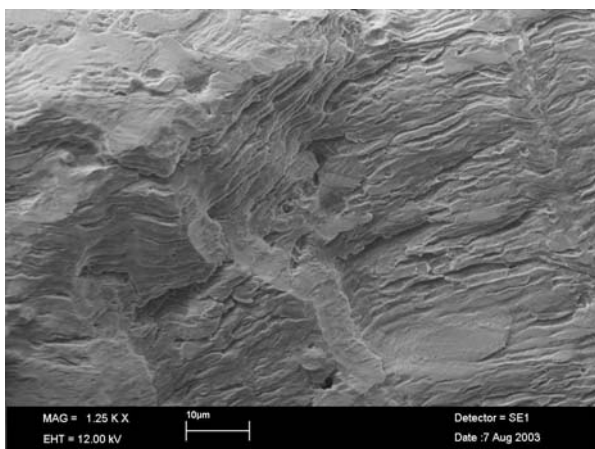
SEM fractograph showing fatigue striations of the sample welded at 1500 rpm.
